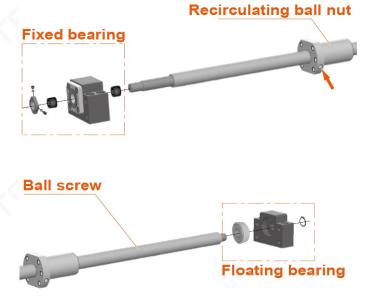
Assembly of the grease nipples and spindle bearings. Do not mount the floating bearing unit of the X axis until installation (p. 11)!
